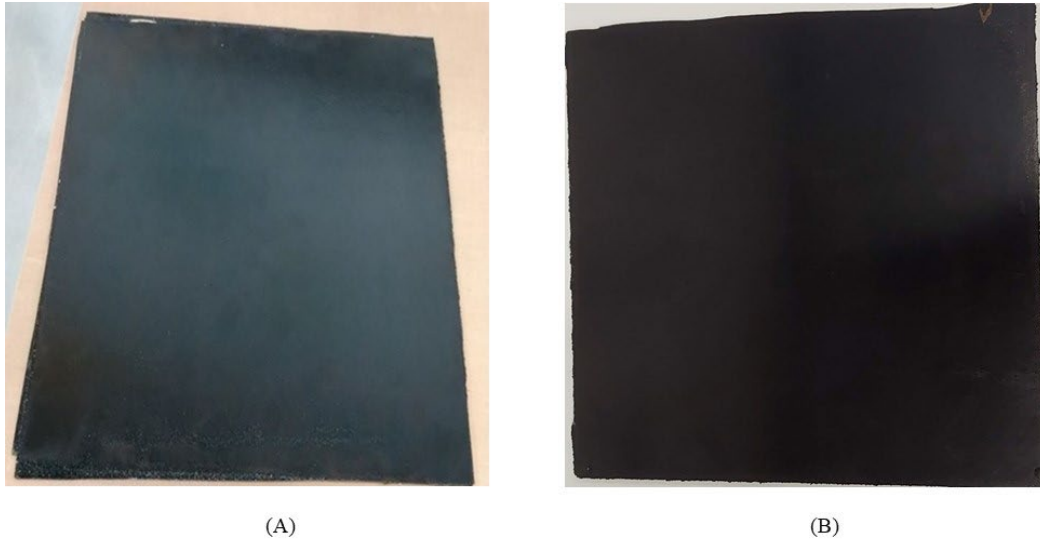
Demoulded Hot-press manufactured Glass/PFA sample at (A) 5bar (B) 10bar.
